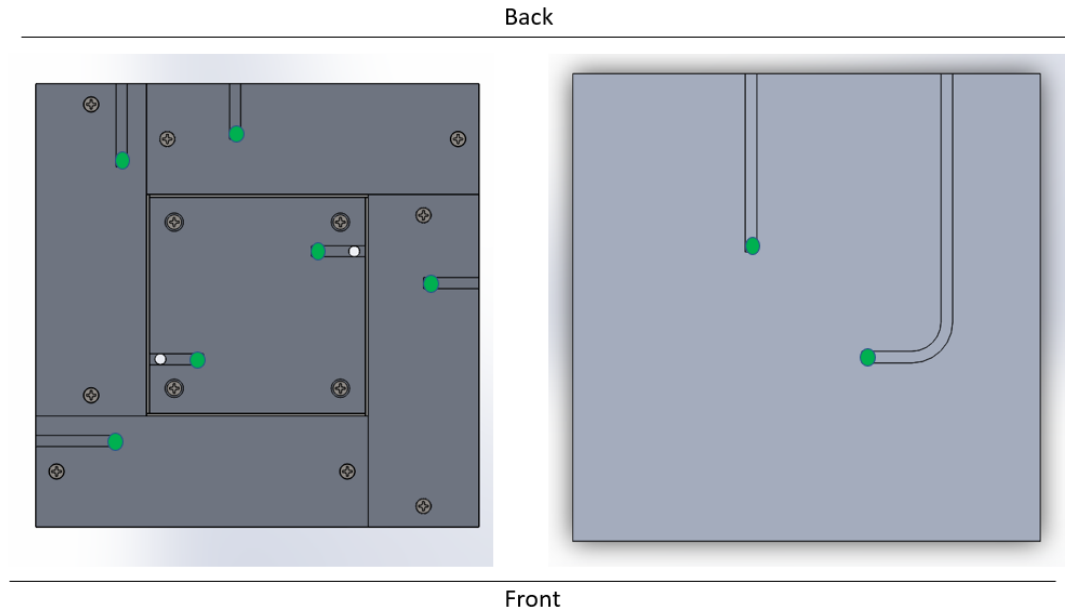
Temperature sensor location in hot (left) and cold (right) plate assembly.
